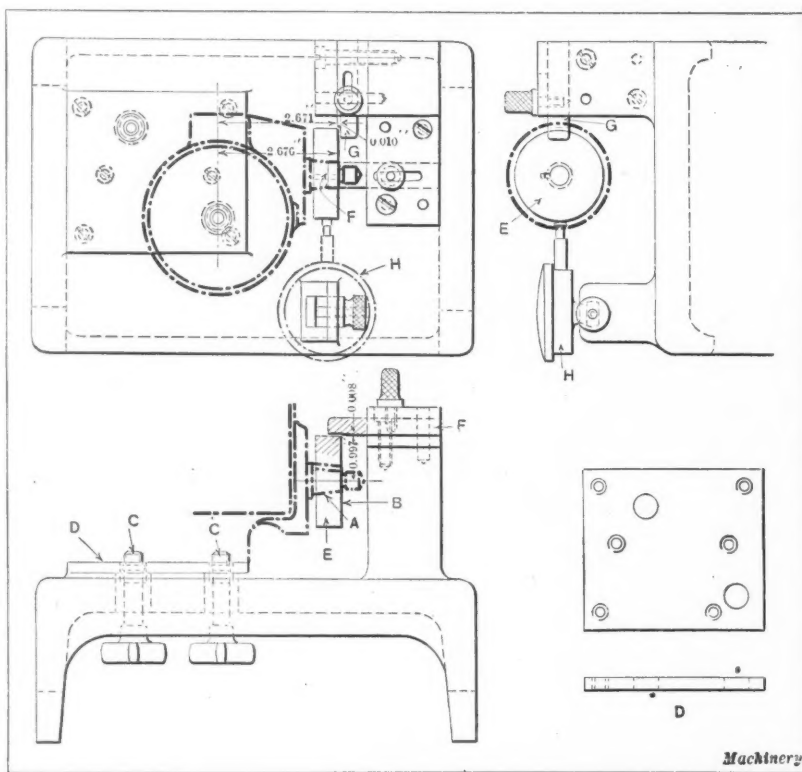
Detailed View of Gaging Fixture for Ignition Distributors
